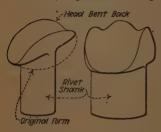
Iron rivets with heads bent back without cracking.
